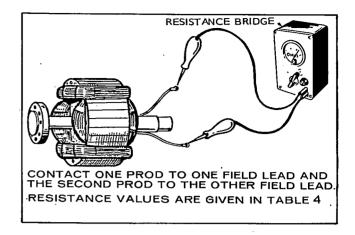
MEASURING ROTOR WINDING RESISTANCE
